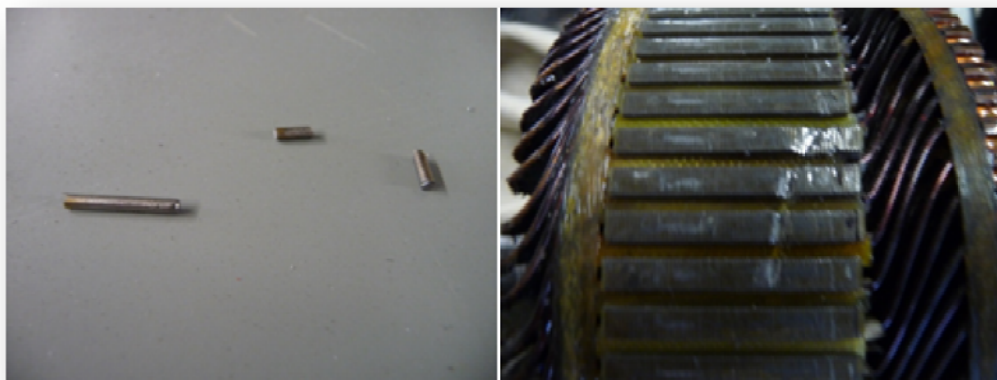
Hardened Steel Rod and Damage to Armature
